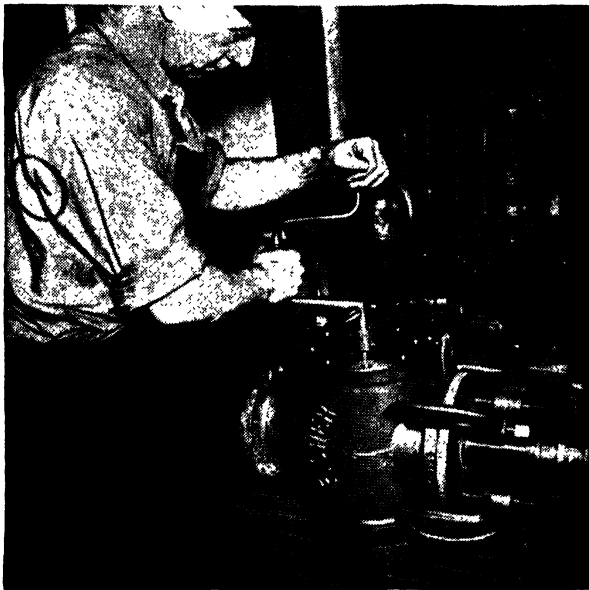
Hand grinding a double-seat regulating valve. (Courtesy of Fisher Governor Co.)
